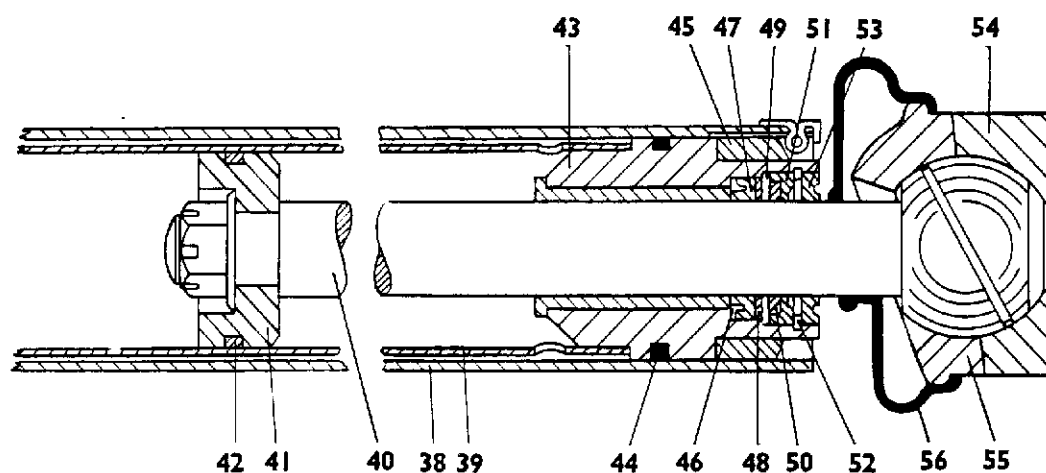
B. HYDRAULIC RAM ASSEMBLY 902357
